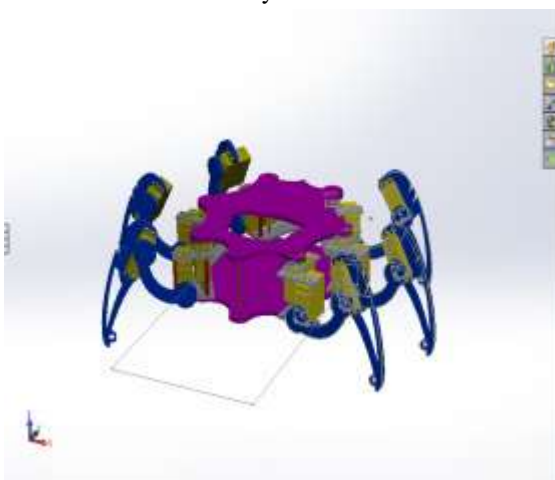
Assembly of hexapod robot(using solidworks 2014)
